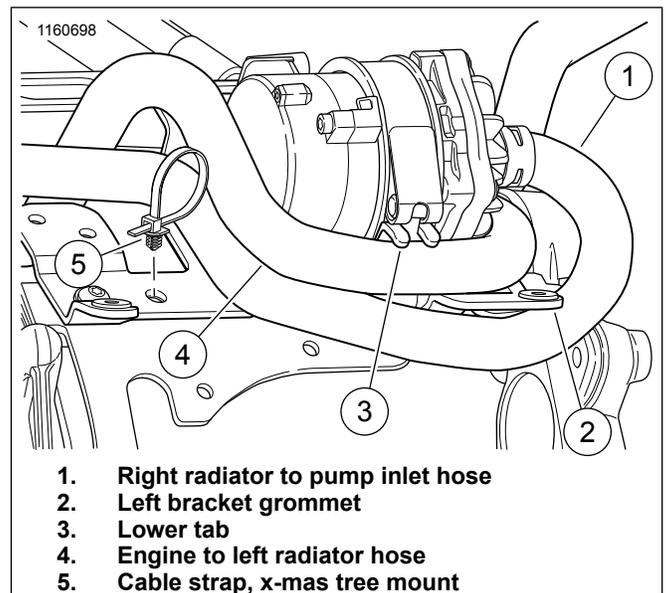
Routing of Right Radiator to Pump Inlet Hose
